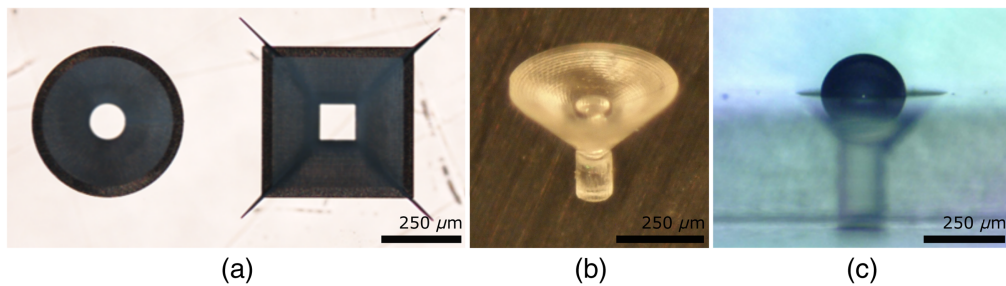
Ball lens holder: (a) top view of the conical and pyramidal design; (b) glass part lifted out after etching the contours, and (c) side view with mounted 300 μm ball lens.
